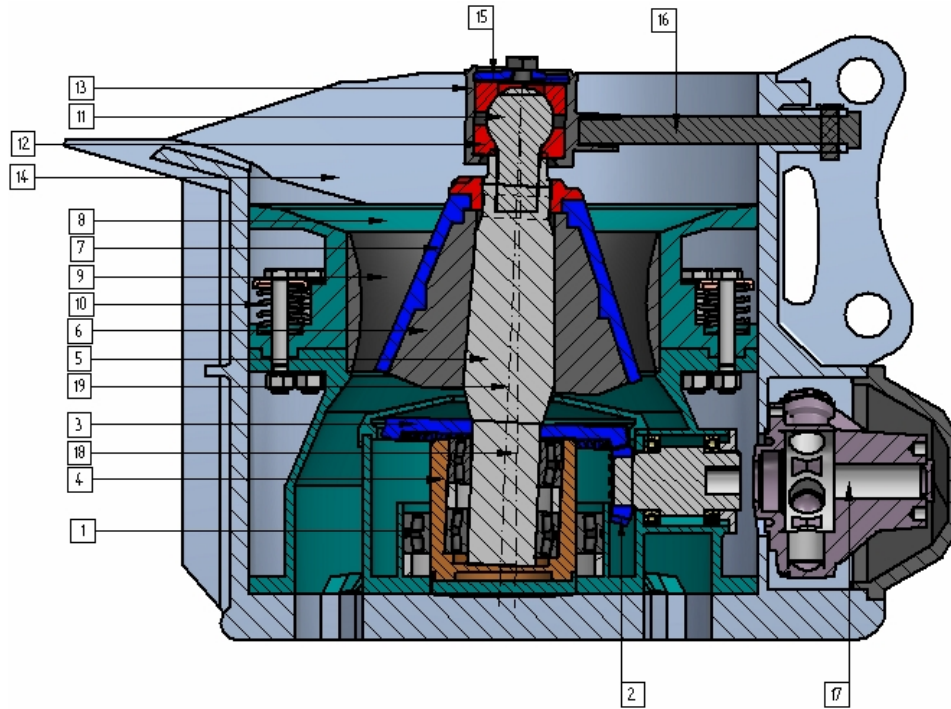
Gyratory crusher bucket type: 1- bearing, 2- conical pinion, 3-conical gear, 4-bushing, 5-shaft, 6-mobile cone, 7-armor, 8-fixed cone, 9-armor, 10-elastic elements, 11-spherical joint, 12- bushing, 13-bearing, 14-bucket, 15-cover, 16-anchored beam, 17-engine, 18-shaft axis, 19-vertical axis
